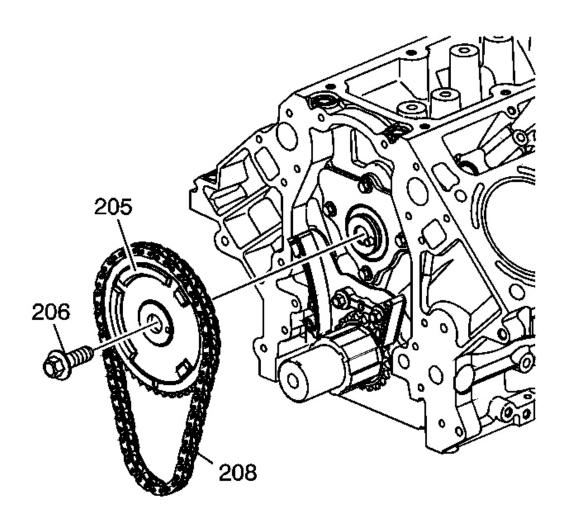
Camshaft Sprocket Bolt Courtesy of GENERAL MOTORS CORP.
